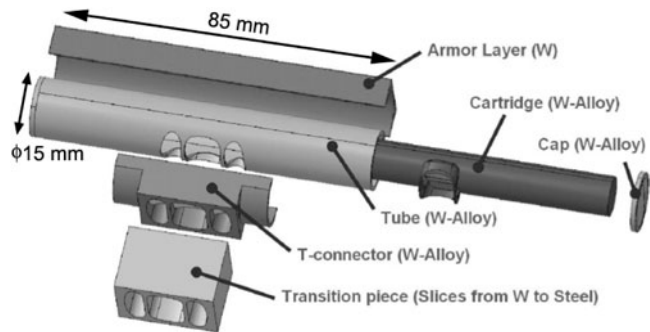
T-tube divertor module geometry shown with component labels.¹
